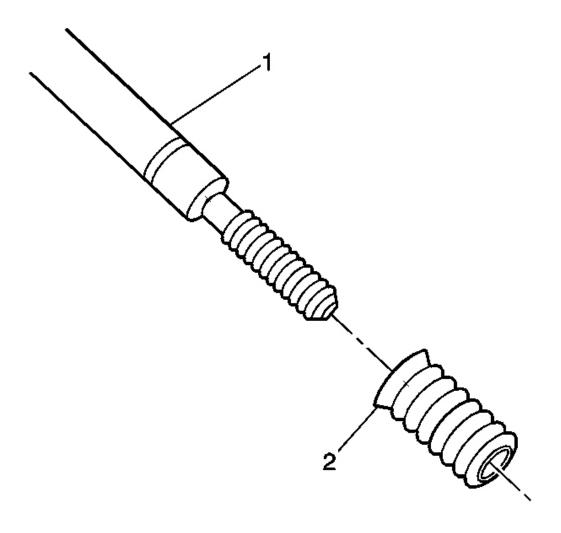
View of Bushing Type Insert Courtesy of GENERAL MOTORS CORP.
